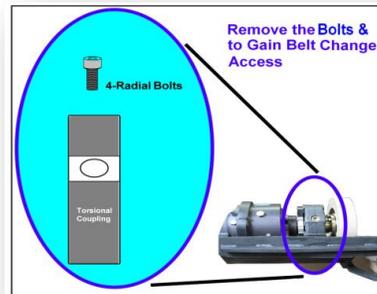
The torsional coupling drive pins and bolts are removed with an Allen style wrench to allow belt access.
